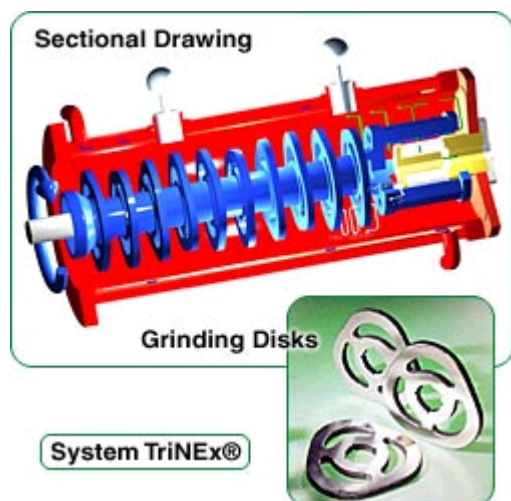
Bead mill with horizontal grinding chamber System TriNEx® (NETZSCH-Feinmahltechnik, Germany)
